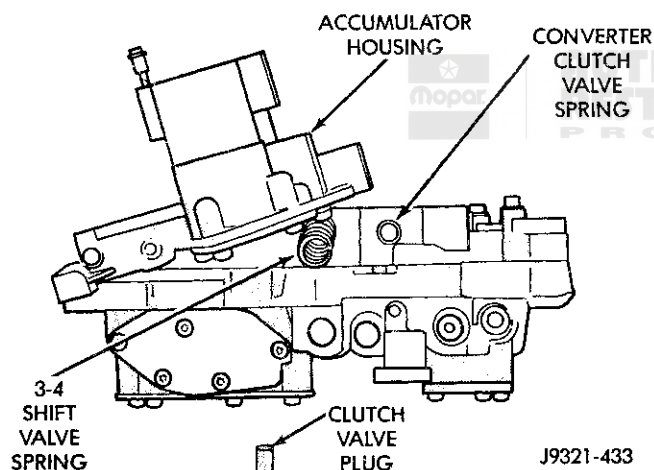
3-4 Shift And Converter Clutch Valve Springs And Plug
